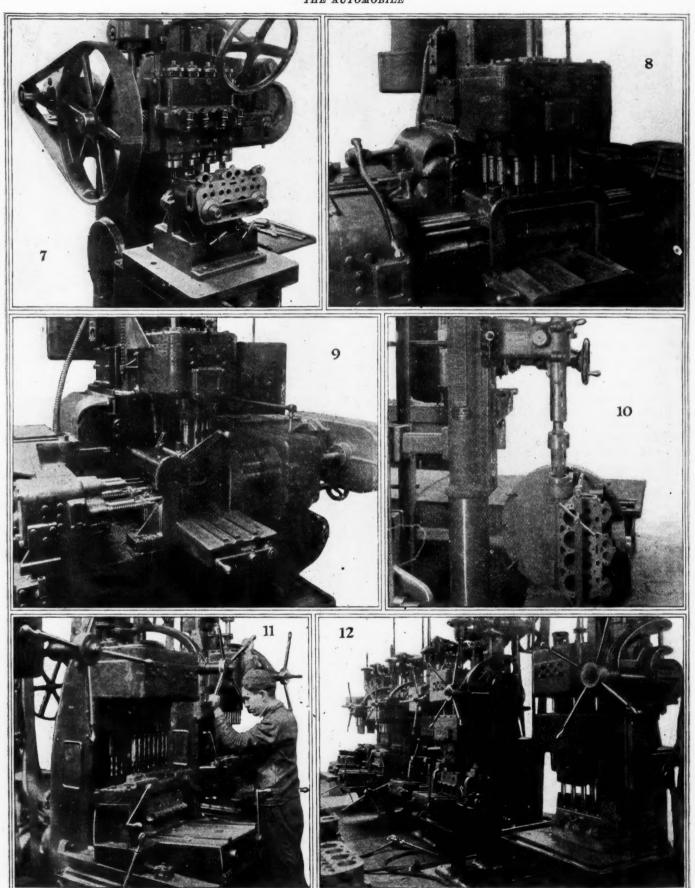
Profiling machine made by Automatic Machinery Co. for profiling valve in section cover surface. Fig. 8—Three-way Foote-Burt drill, drilling 35 holes simultaneously, taking care of all the bolt holes on the top and both ends of the cylinder block. Fig. 9—Three-way Foote-Burt drill, drilling on front and rear sides of block and on top. Fig. 10—Cincinnatl 24-in. radial which chamfers the gas intake manifold passage, counterbores and faces water circulation hole. Fig. 11—One of the Foote-Burt machines which works on the valve stem guide holes. There are a battery of these, one operator taking care of five machines, handling 75 blocks an hr. Fig. 12—View of the battery of Foote-Burt drills which is handled by one operator working on the valve stem guide holes and the valve opening chambers
